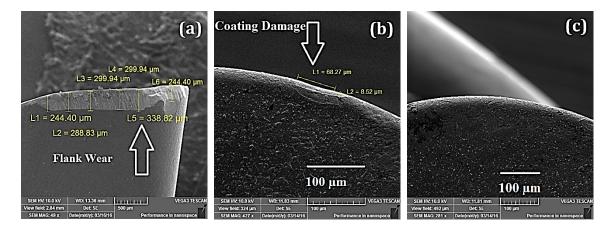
Flank wear in dry cutting (a), Tool wear using coolant (b), Cutting tool wear using cryogenic cooling (c)
